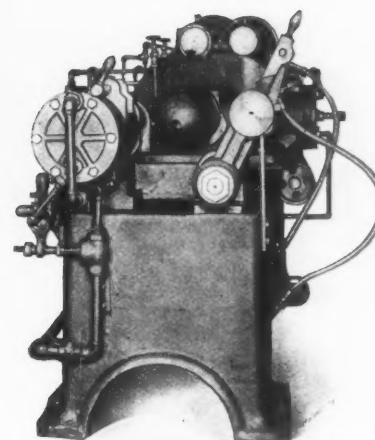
End View of Warren "Hydraulic" Lathe for turning Large Shells
